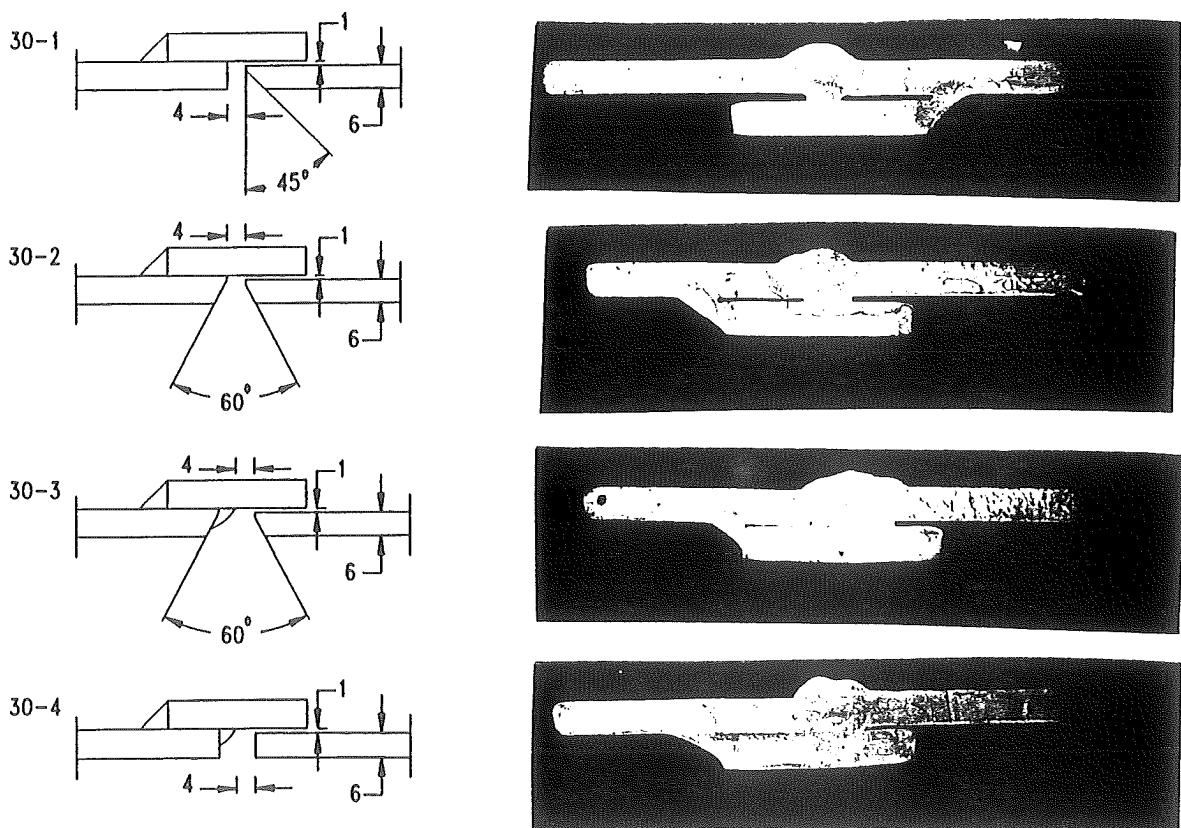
Sections of the welds - welding tests Serie 2.
